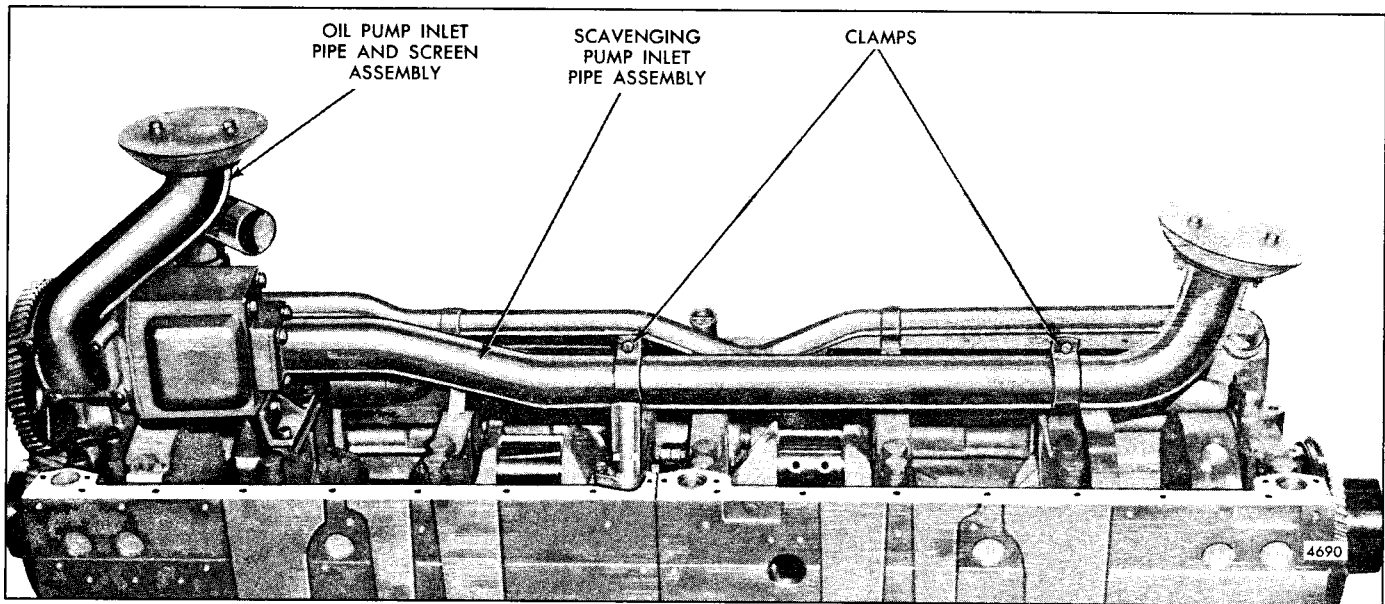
Typical Oil Pump Inlet Piping (Rear Sump)
